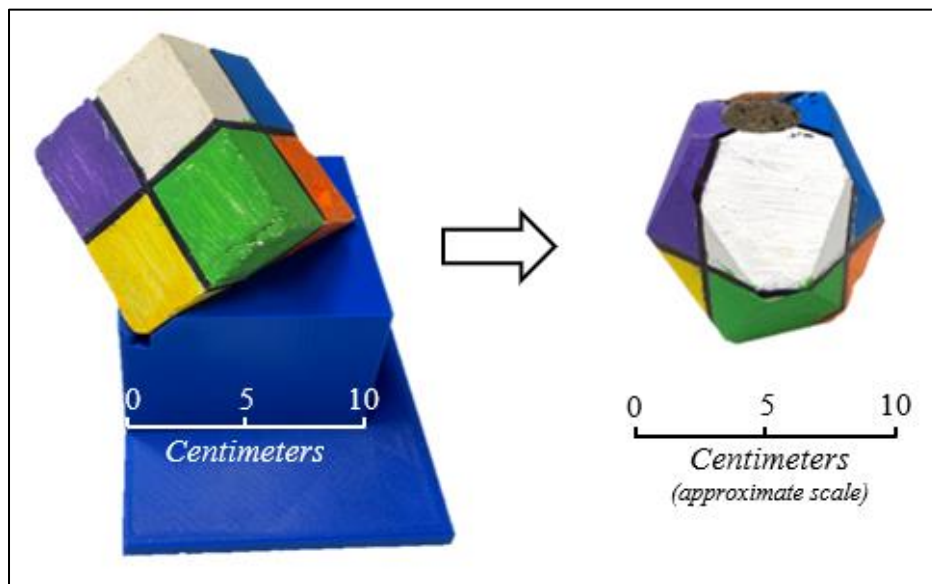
Cubic test block and 3D printed fixture (left), and cuboctahedral test block (right).
